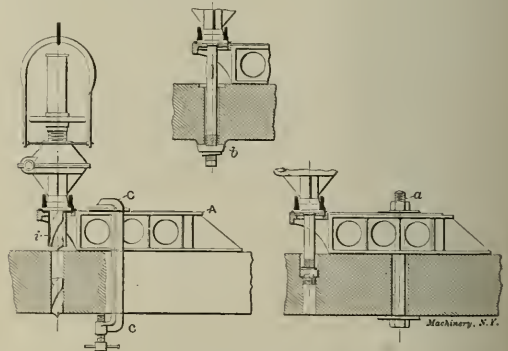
Showing Use of Tool with Guide Bushing for Accurate Drilling; also Counterboring and Back Facing.
